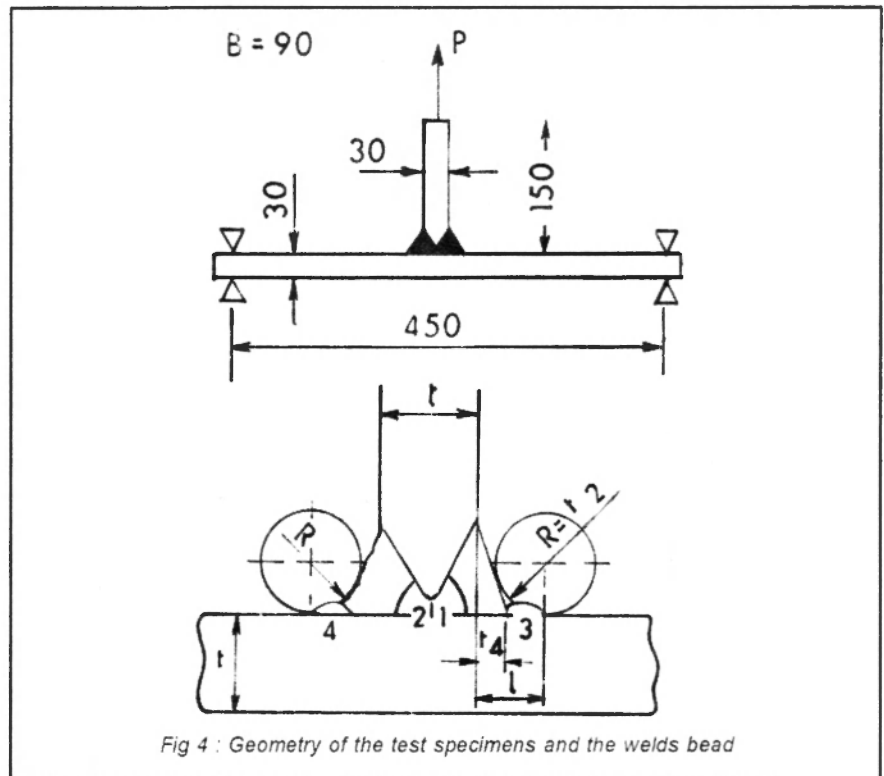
Geometry of the test specimens and the welds bead
